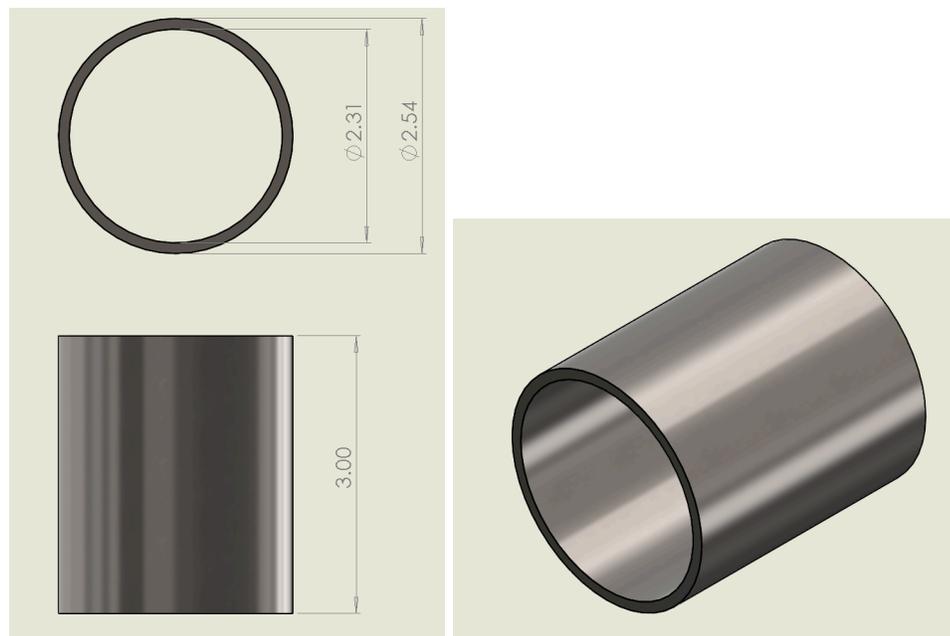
SolidWorks drawing showing the AISI 316 stainless steel rigid tube model used in feasibility testing.
